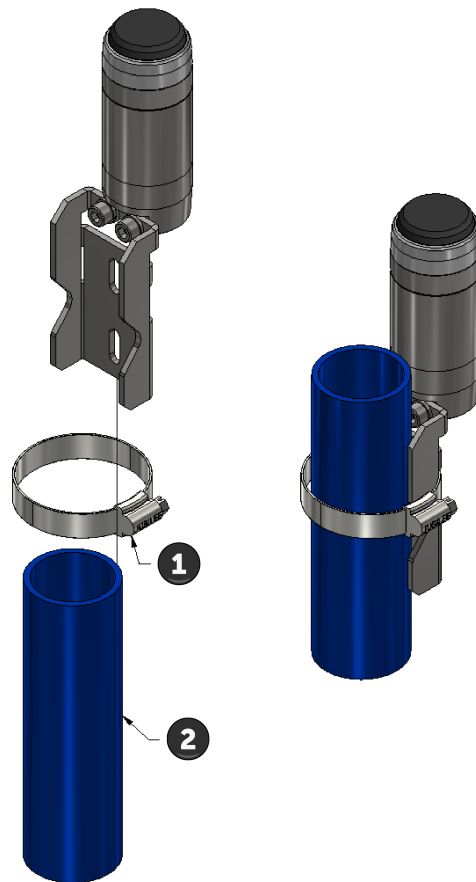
5: Attaching Mounting Bracket to a Vertical Pipe
